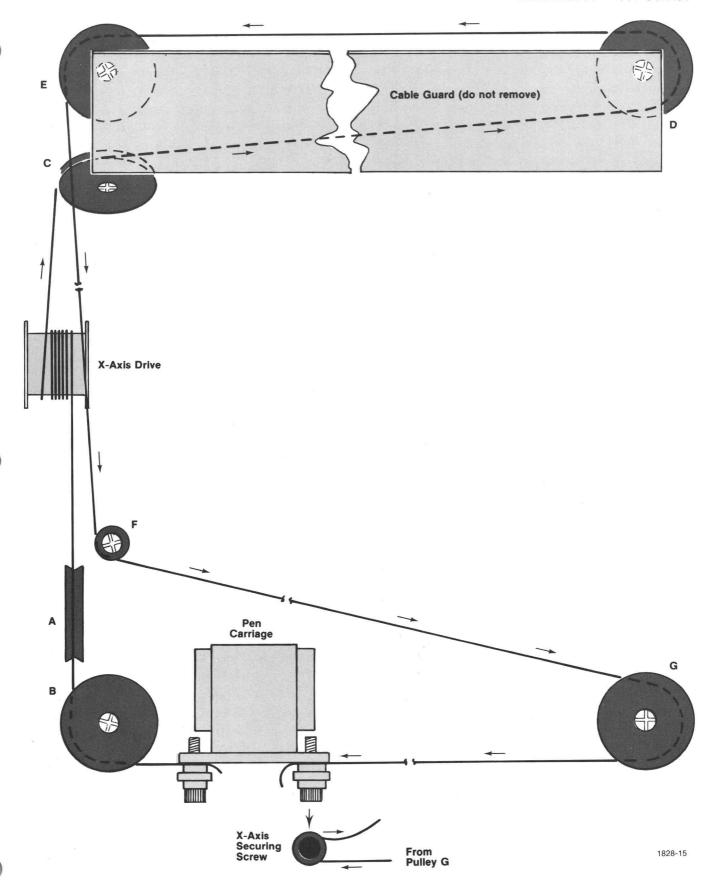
X-Axis Cable Stringing—Part 2.
